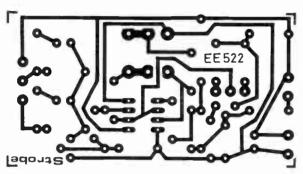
Full size printed circuit board master for the Mini Strobe. This board is available from the *EE PCB Service*: code EE522.
